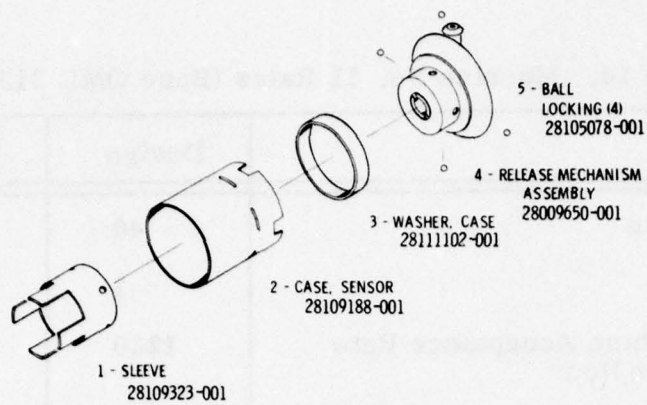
Machine No. 11 - Sensor Release Mechanism and Case Assembly
